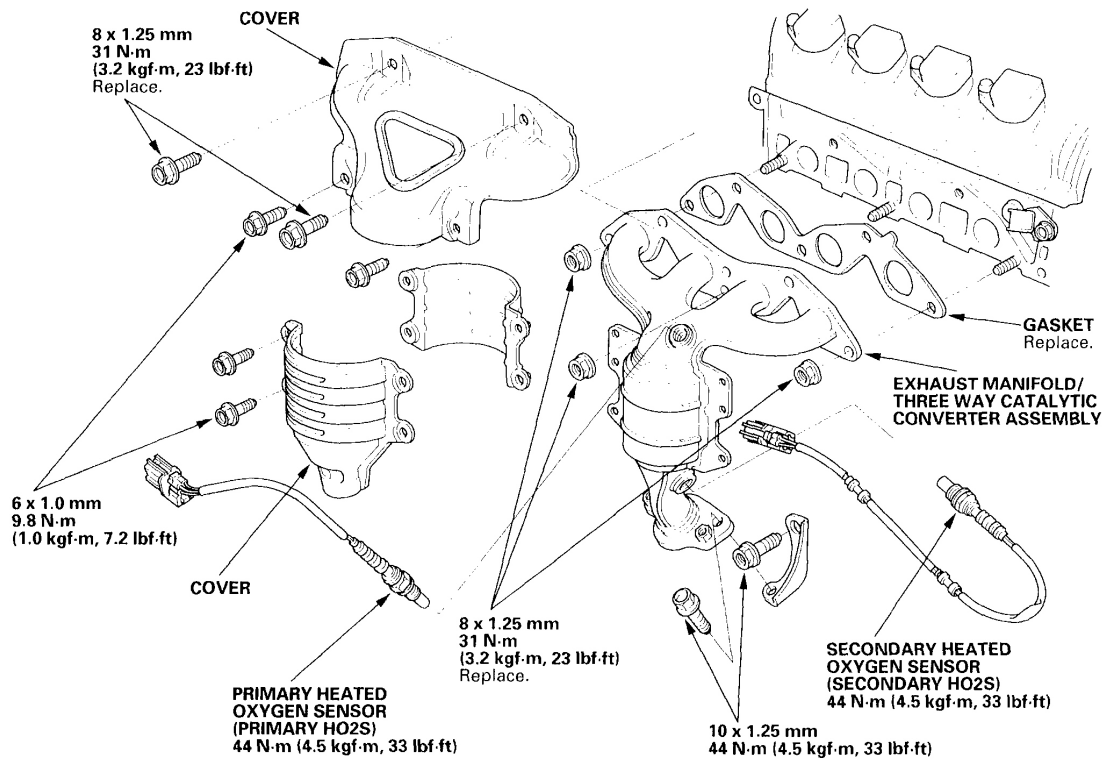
Exploded View Of Exhaust Manifold (D17A1, D17A6 Engines) With Torque Specifications
